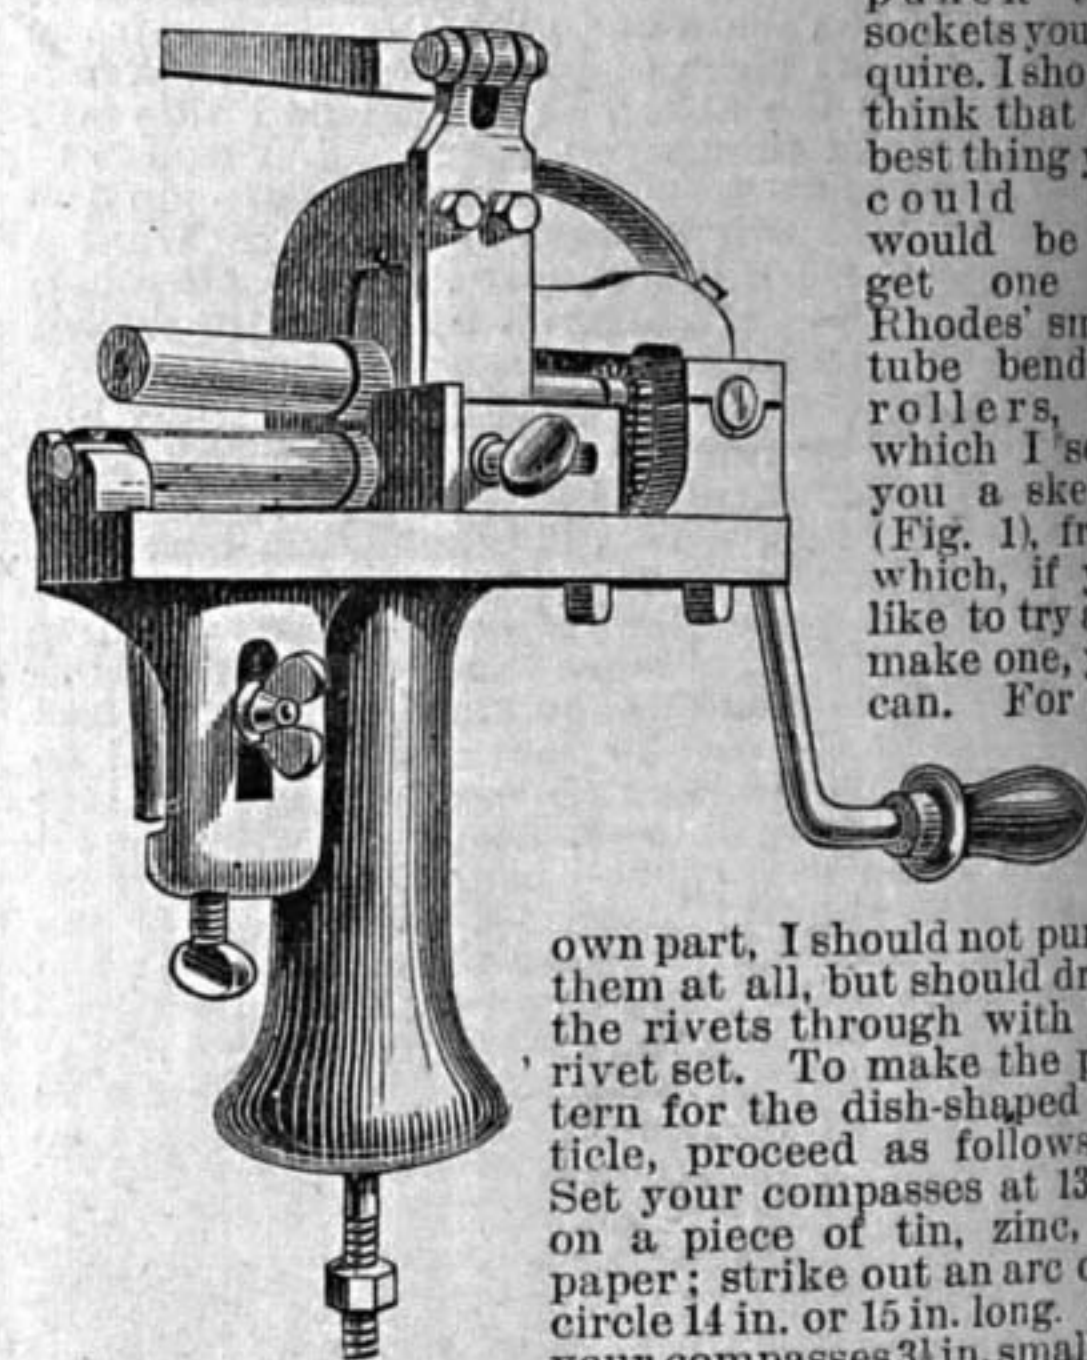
Machine for forming or bending Small Tubes or Cylinders, with or without Bead, 6 in. long, 1 in. and upwards in Diameter.
